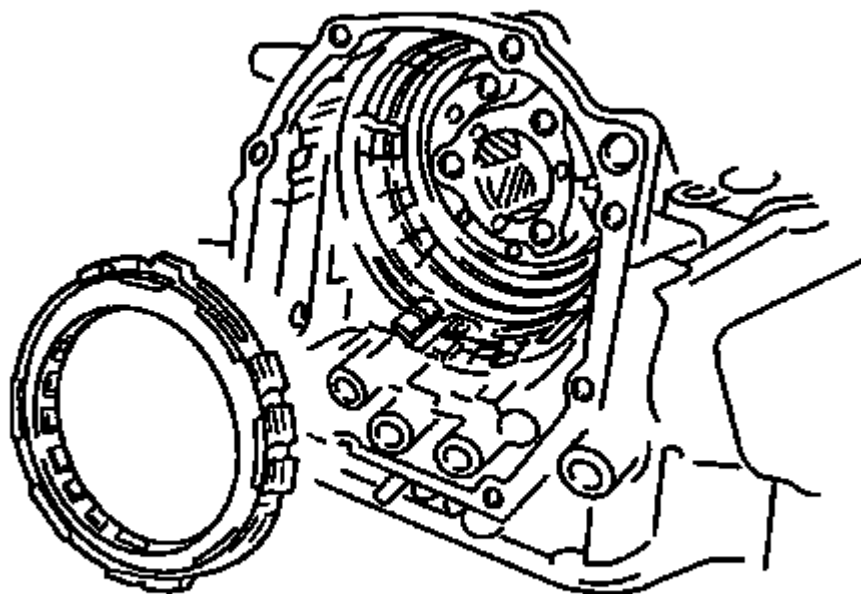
No. 2 One-Way Clutch & Transaxle Case
